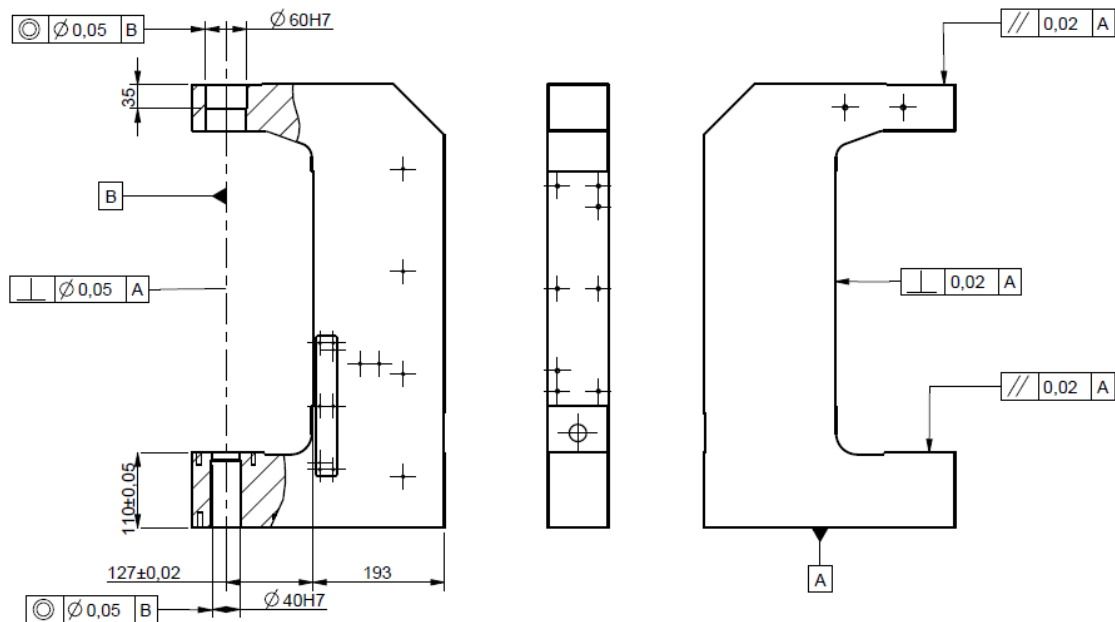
Main tolerance for the fabrication of the press frame
